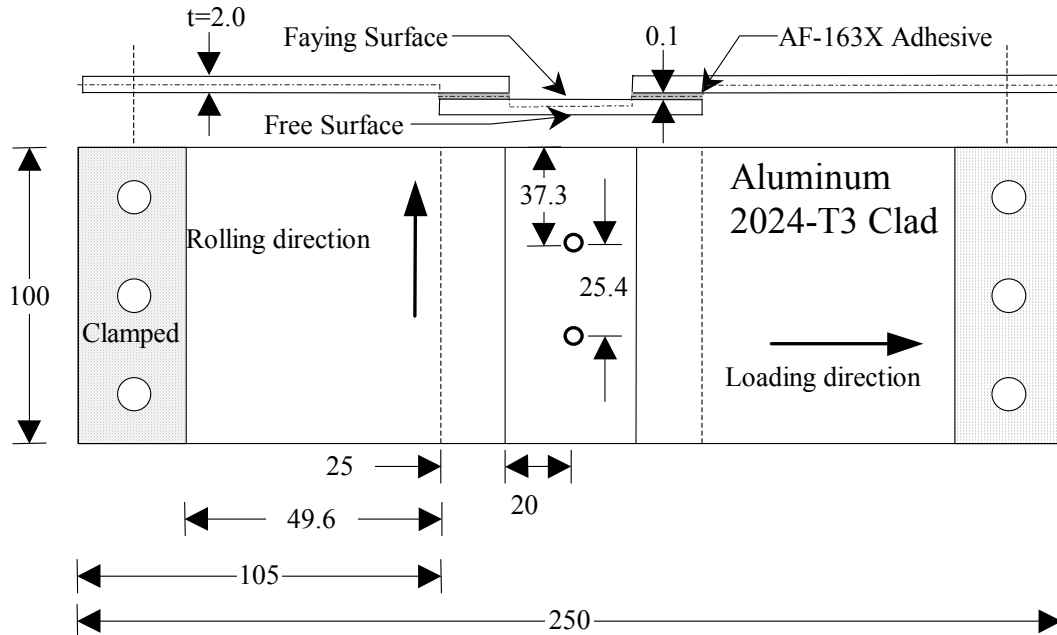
Two holed combined tension and bending specimen (dimensions in mm).
